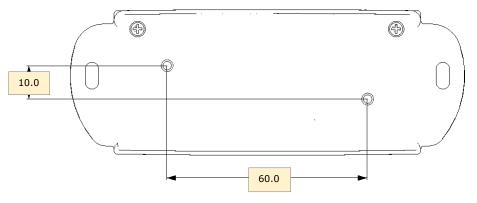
LDSBus HVT-Junction Dimension – Bottom View
